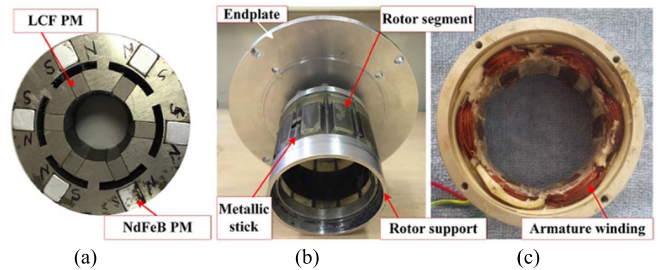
Parallel-type PS-SFMM prototype. (a) Inner stator. (b) Rotor. (c) Outer stator.
